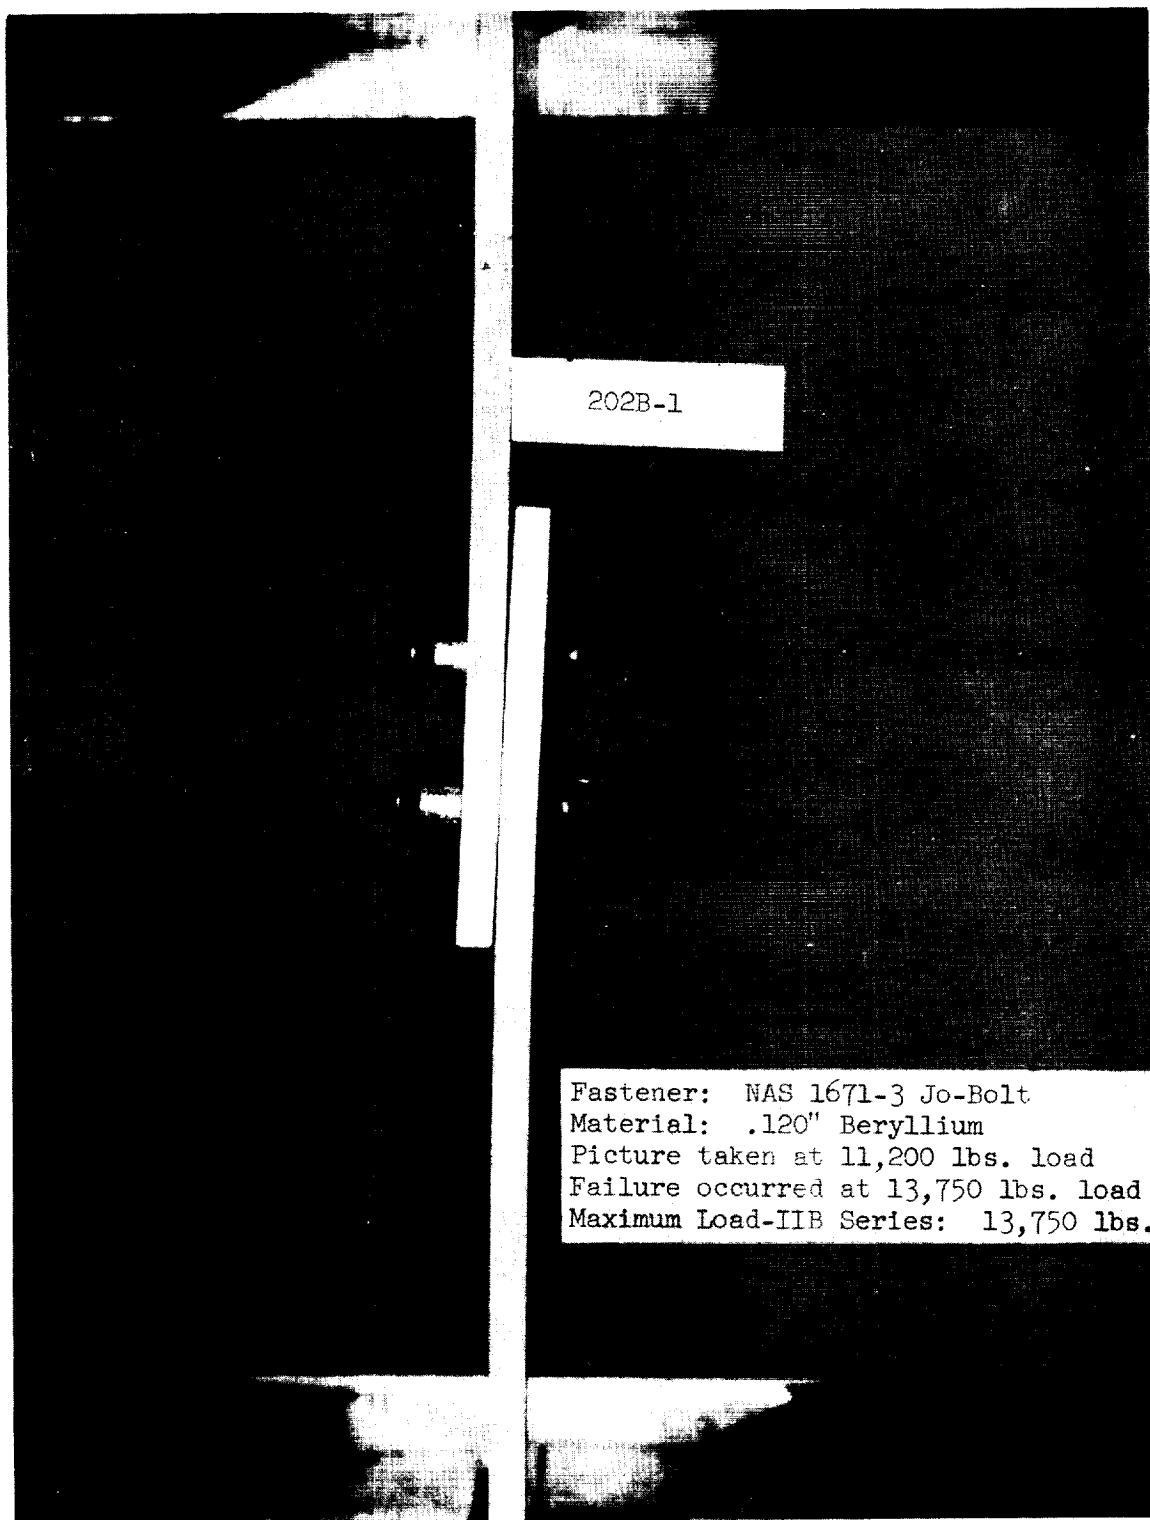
TYPE IIB SPECIMENS - JO-BOLT FASTENERS
